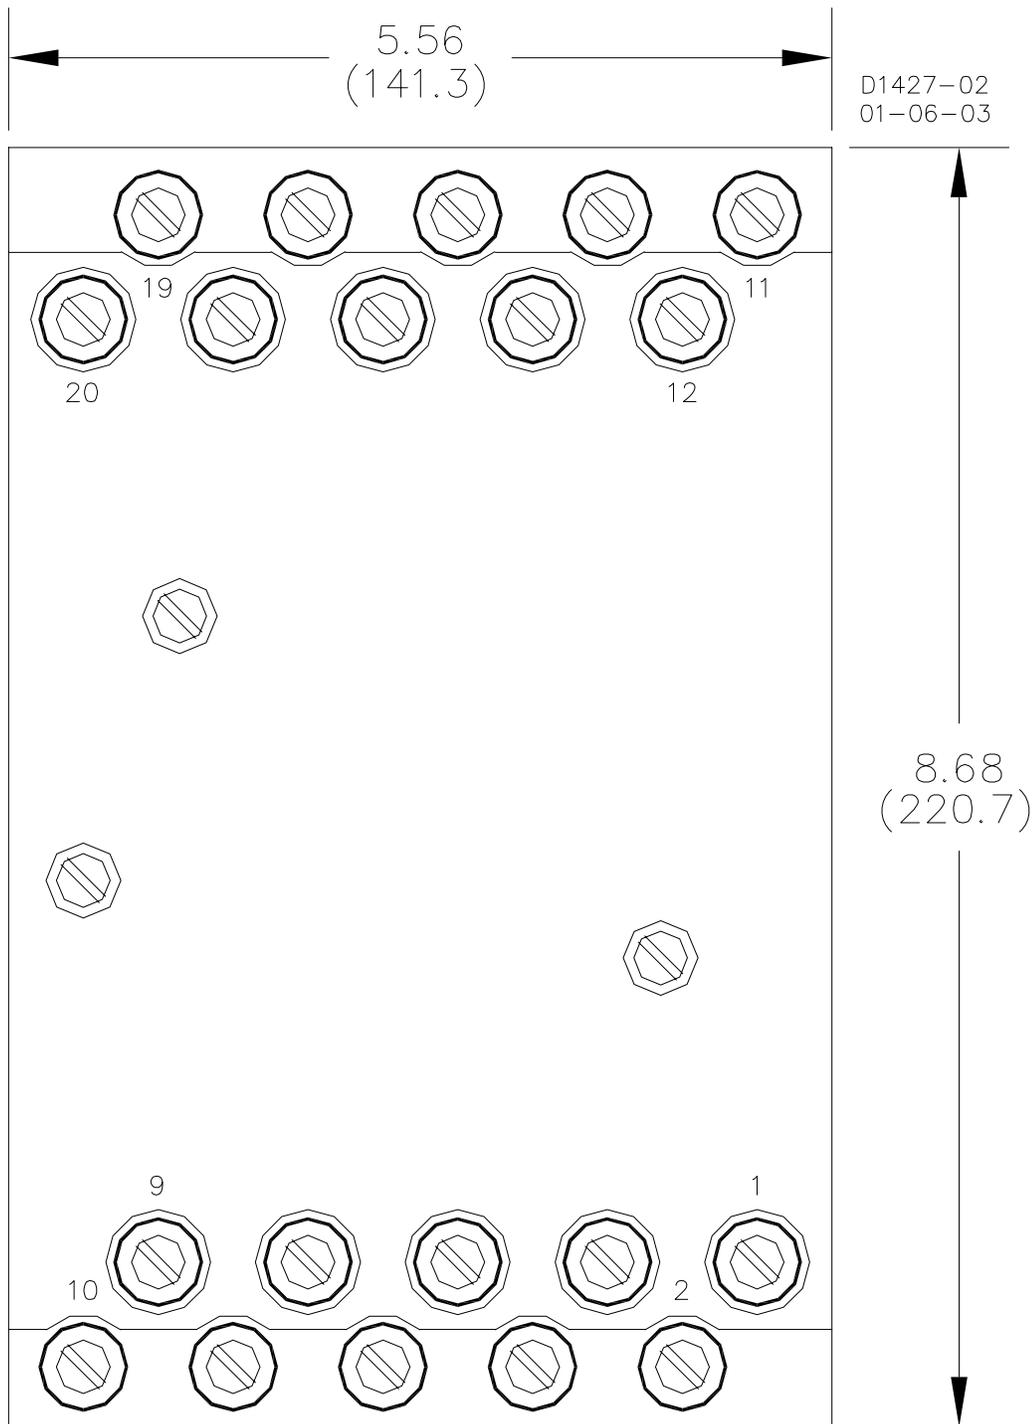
Case Dimensions, Rear View, Projection-Mount Case
